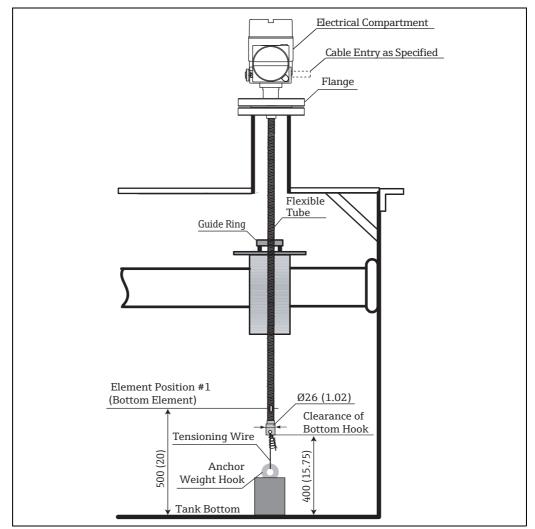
Guide Ring and Anchor Weight, Unit of Measurement: mm (in)
